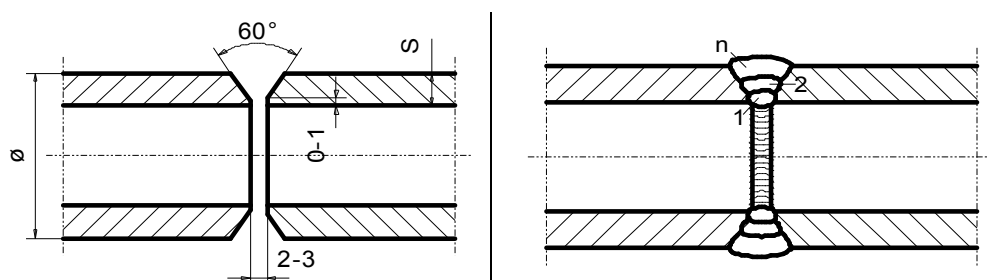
Details of the preparation for welding joints for manual 141-method (GTAW) and the sequence of the welding process.
